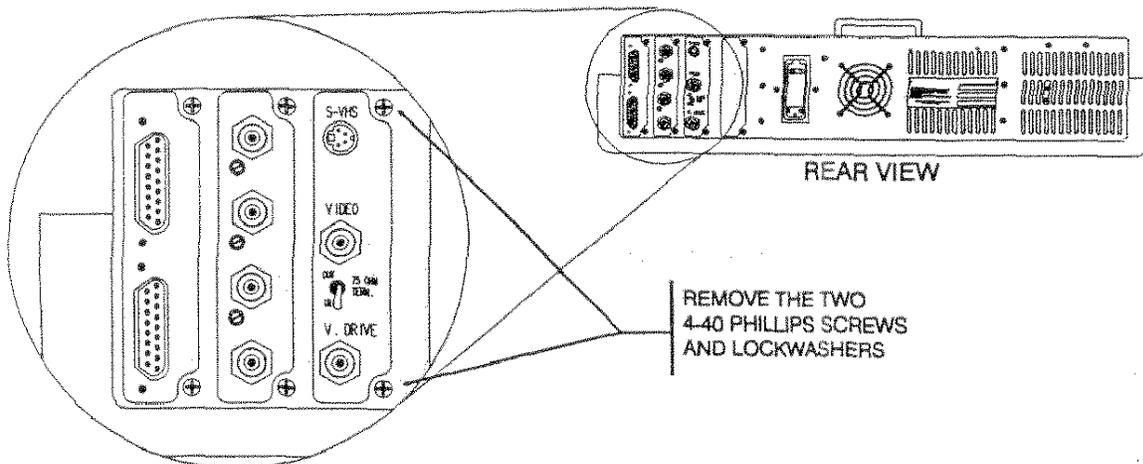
QUAD VIDEO DECODER MODULE REMOVAL
